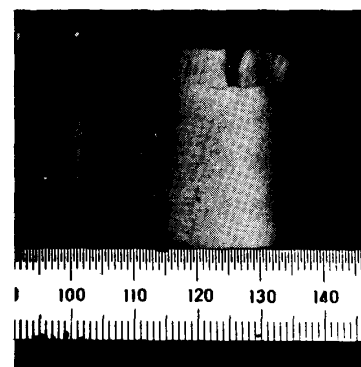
Appearance of crack on overlay-weldment in side bend specimen
